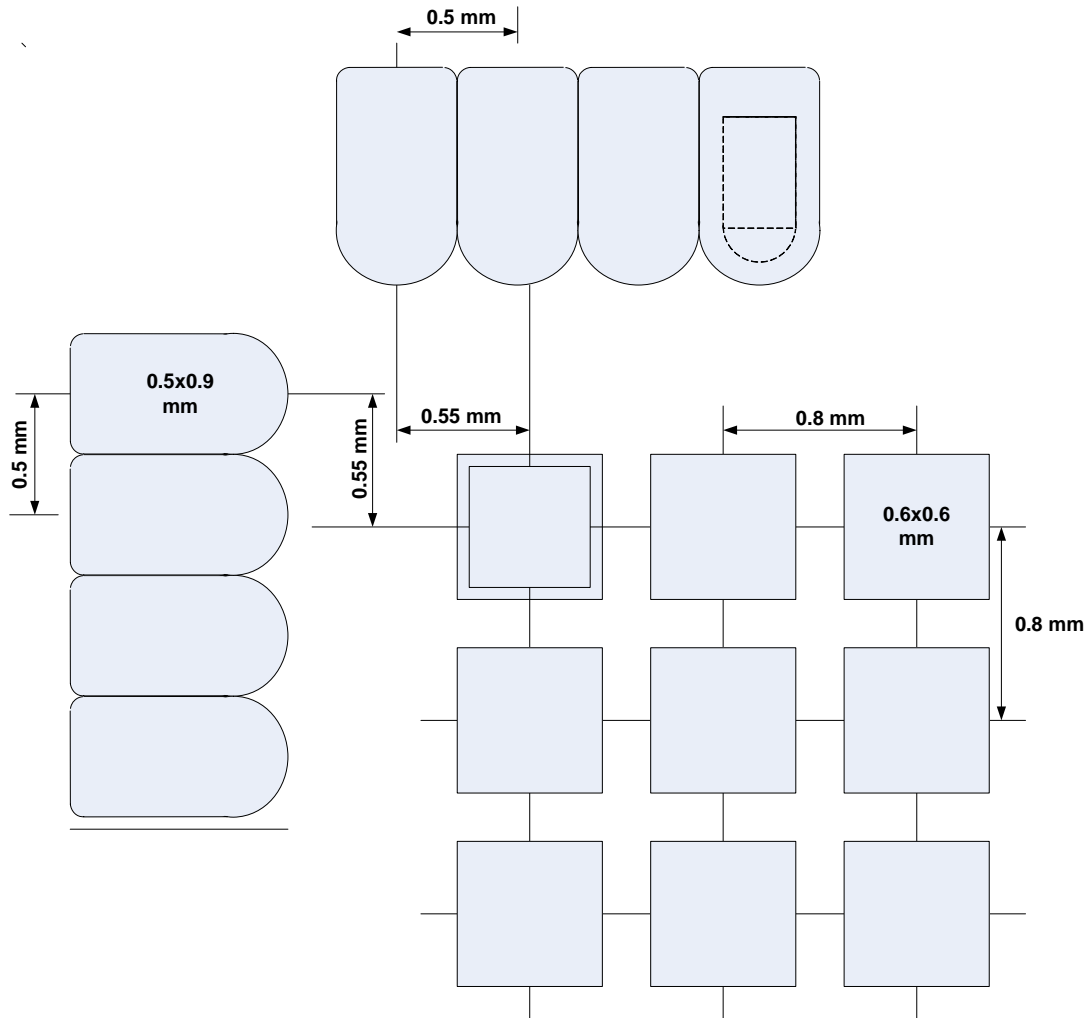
99-Pin LGA Solder Mask Pattern
